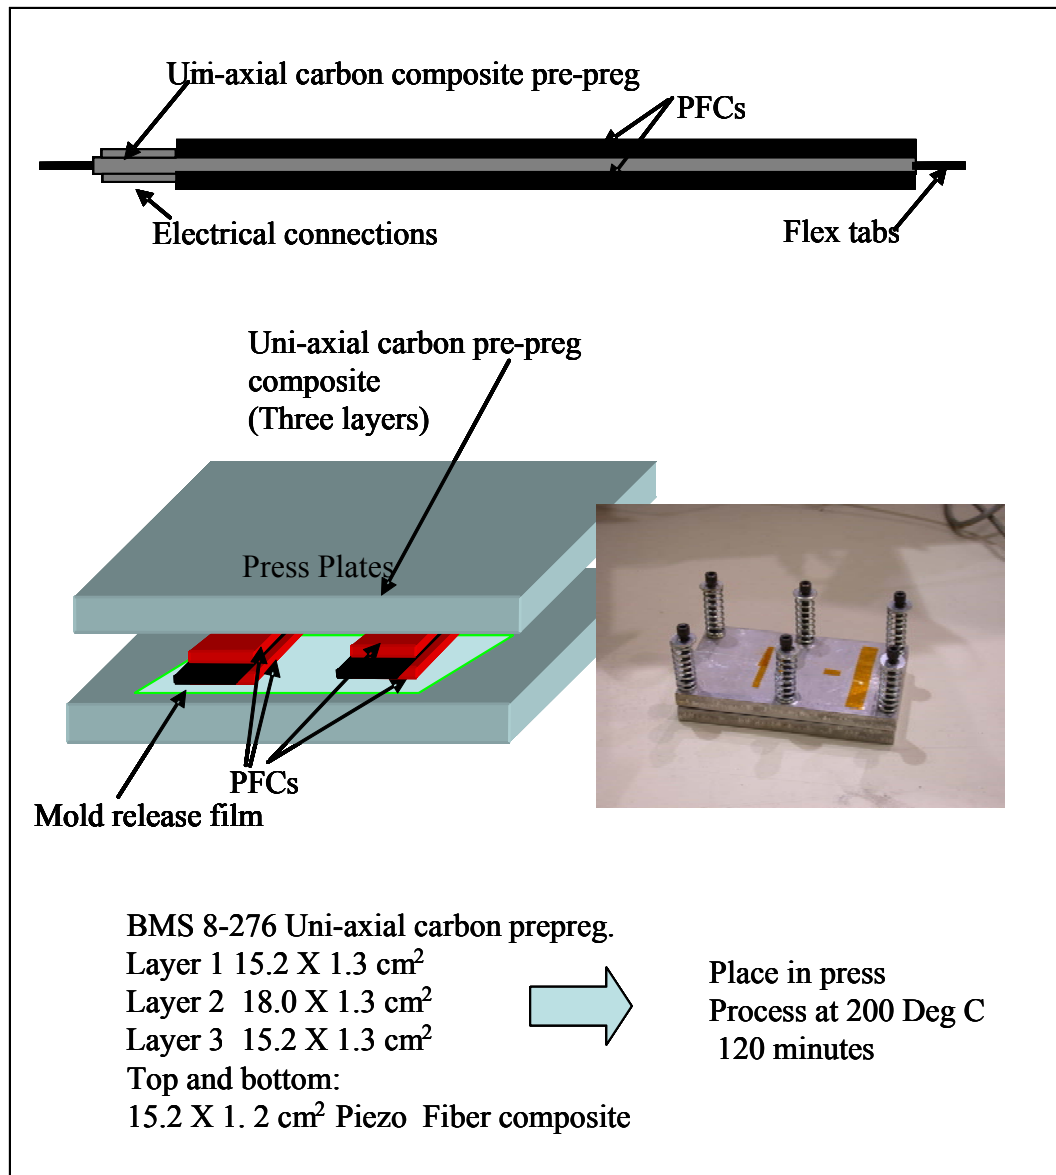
Bimorph beam assembly process. Top: Bimorph cross section, Middle Left: Fabrication lay-up. Middle Right: Assembly press Lower: Layer specifications.
